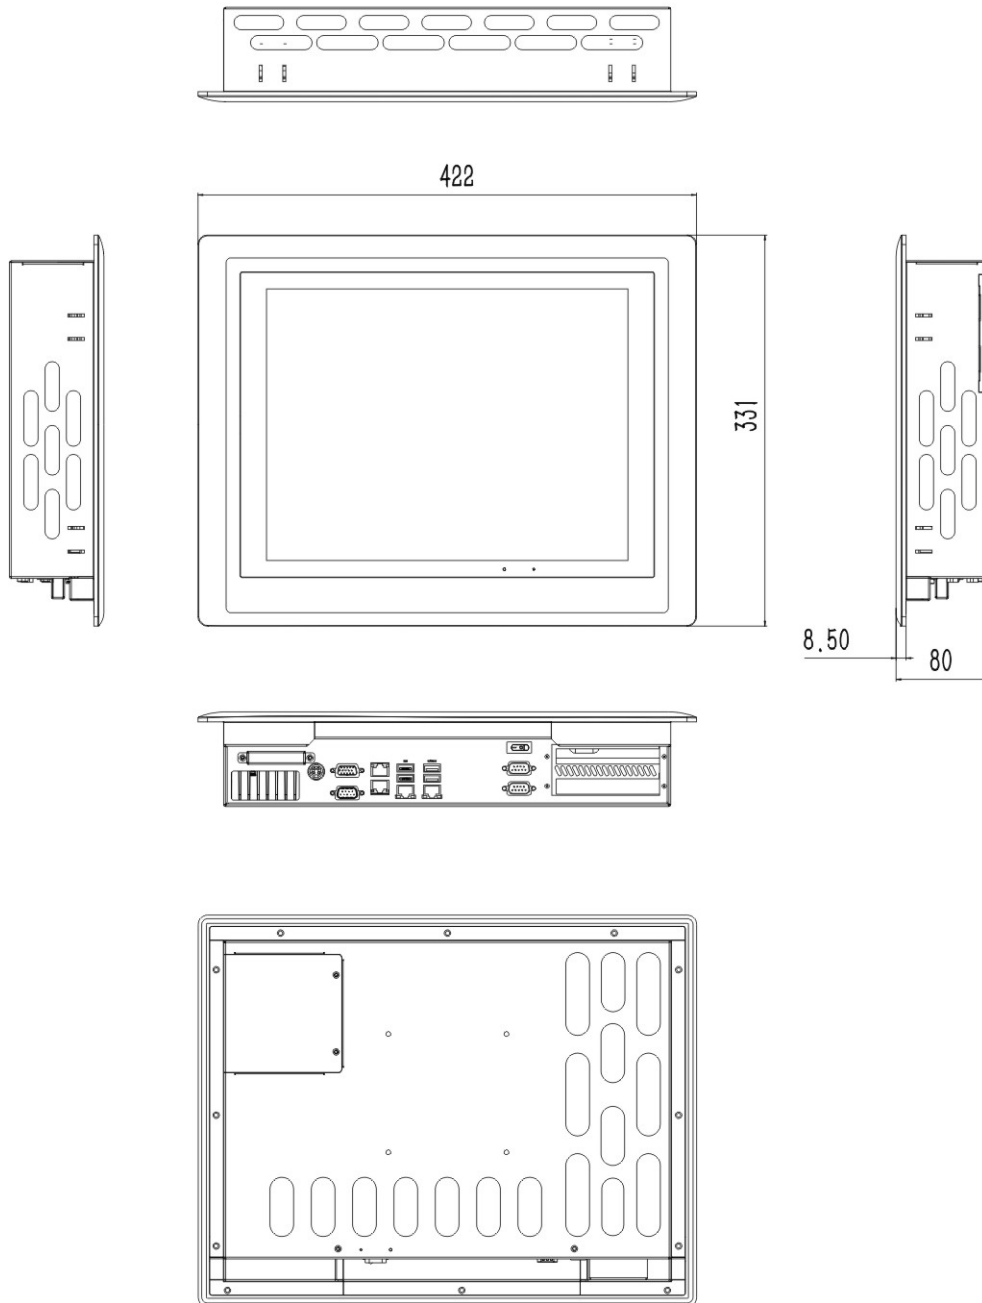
PPC-5152-D525-E Dimensions (mm)
